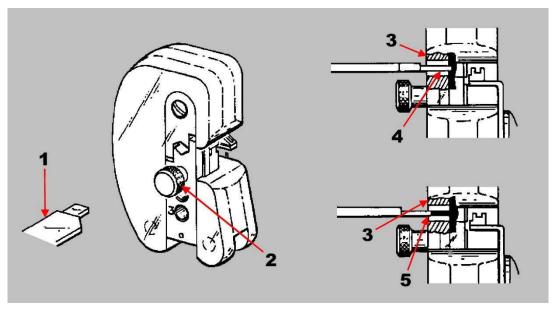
Inspecting the insulation barrel section of the crimping chamber
